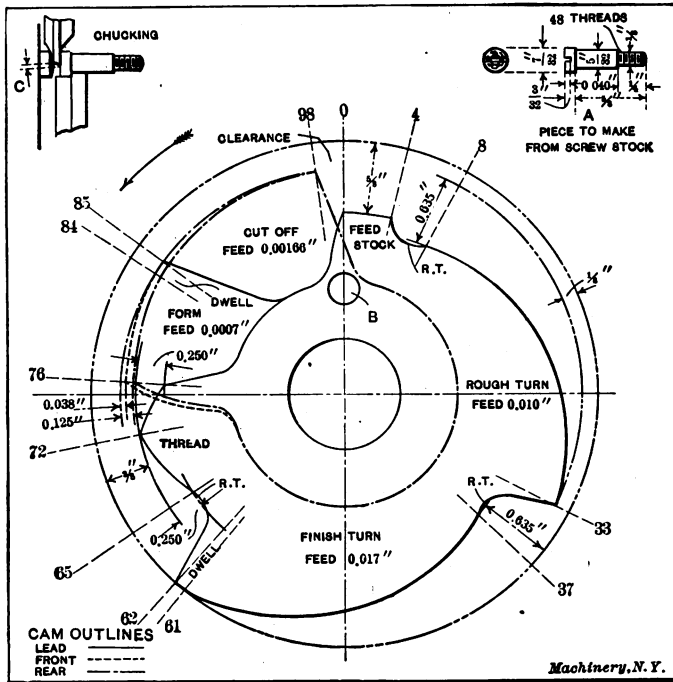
Turret and Cross-slide Cams for Making a Steel Screw
